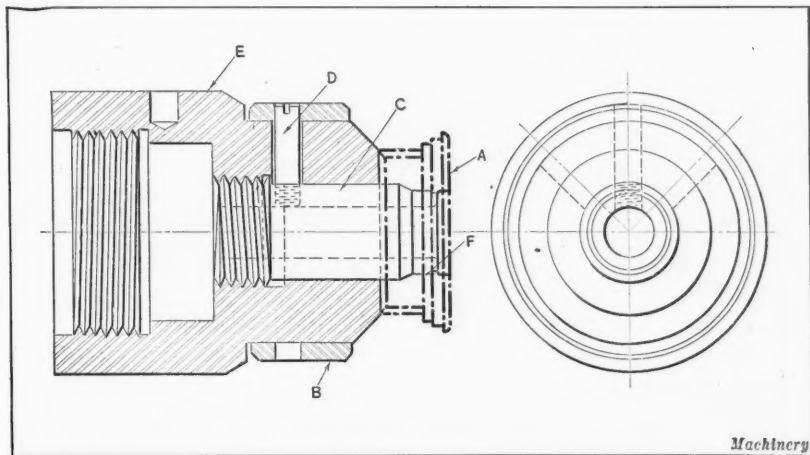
Screw Chuck provided with Arbor and Pilot Bearing
